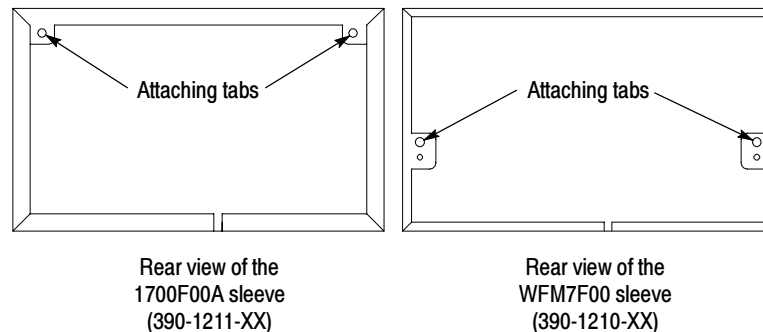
Rear view of the WFM7F05 sleeves, showing the locations of the attaching tabs and screws
